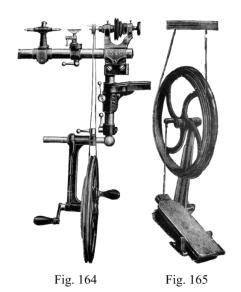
Hand Wheel Fit-Up Fig. 165 – Foot Wheel
